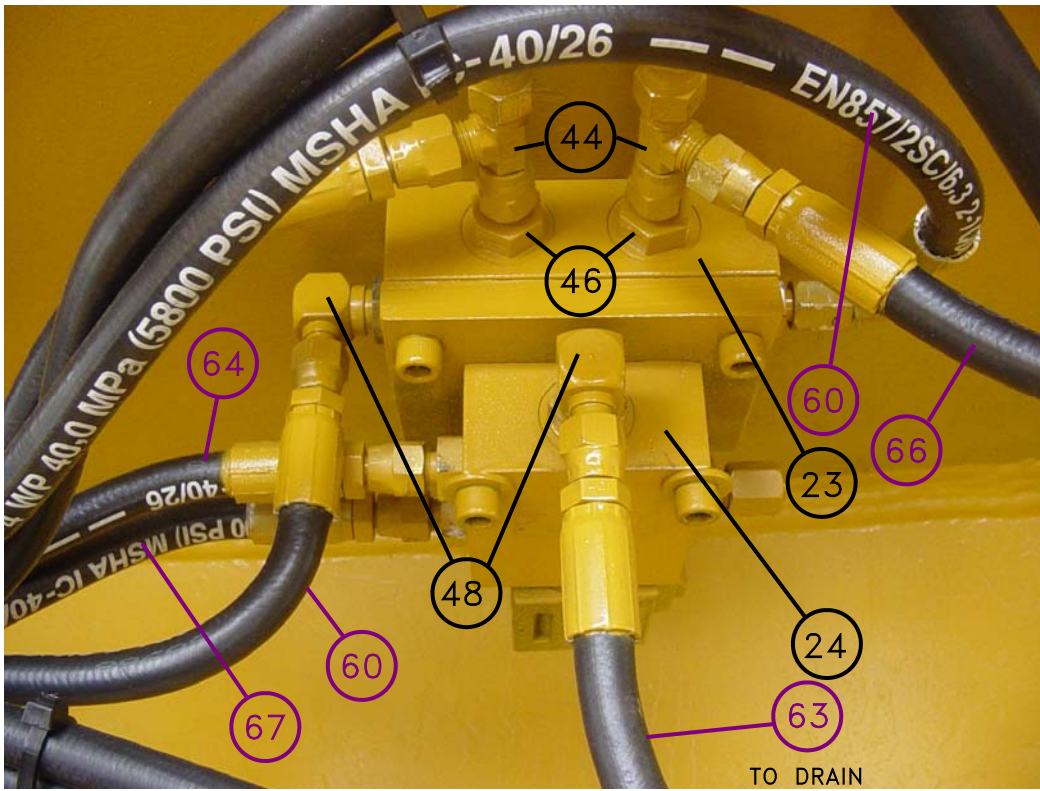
HYDRAULIC – INSIDE BOOM TIP
